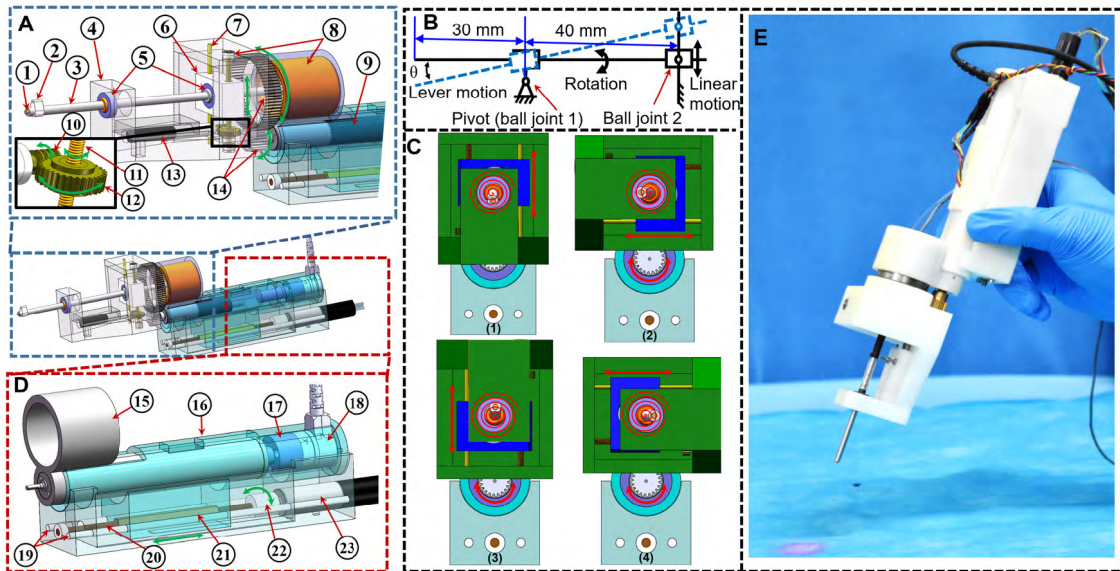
The surface-scanning device, showing (A) detailed configuration of scanning mechanism: ① fiber bundle, ② fiber fixture, ③ stainless tube, ④ outer frame, ⑤ ball joint, ⑥ slide block, ⑦ slide guide, ⑧ bearing, ⑨ motor 2, ⑩ worm, ⑪ M2 screw, ⑫ worm gear, ⑬ motor 1, ⑭ gear, (B) kinematics model of the scanning mechanism, (C) the desired spiral scanning trajectory followed by the probe, (D) detailed configuration of active linear motion mechanism: ⑮ proximal frame, ⑯ proximal slide block, ⑰ sensor fixture, ⑱ force sensor, ⑲ linear guide, ⑳ M3 screw, ㉑ nut, ㉒ coupling, ㉓ motor 3, (E) the prototype of the device.
